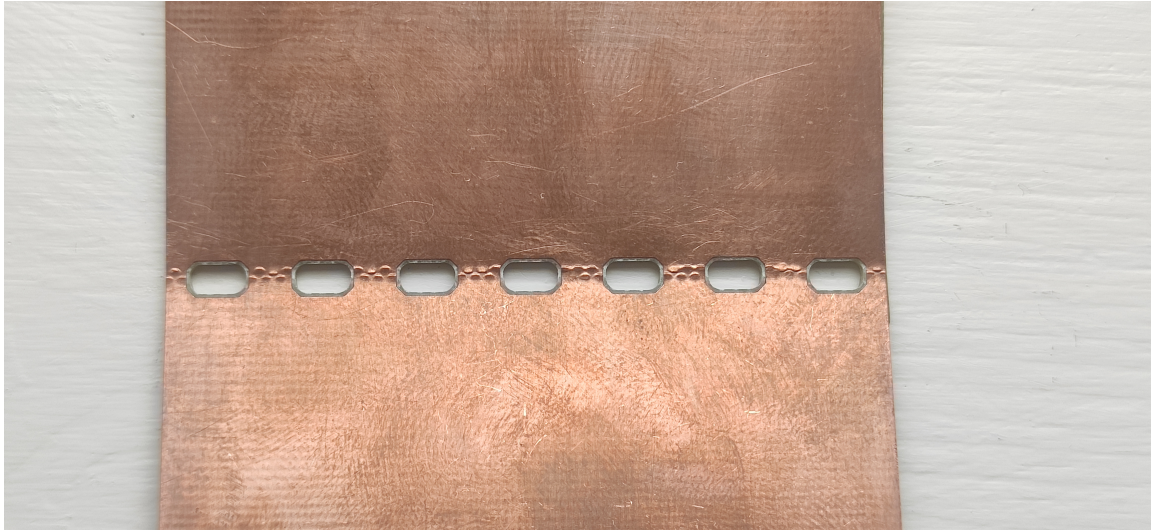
Top side of the mechanical test specimen "Eco4" after the three-point-bending test.
